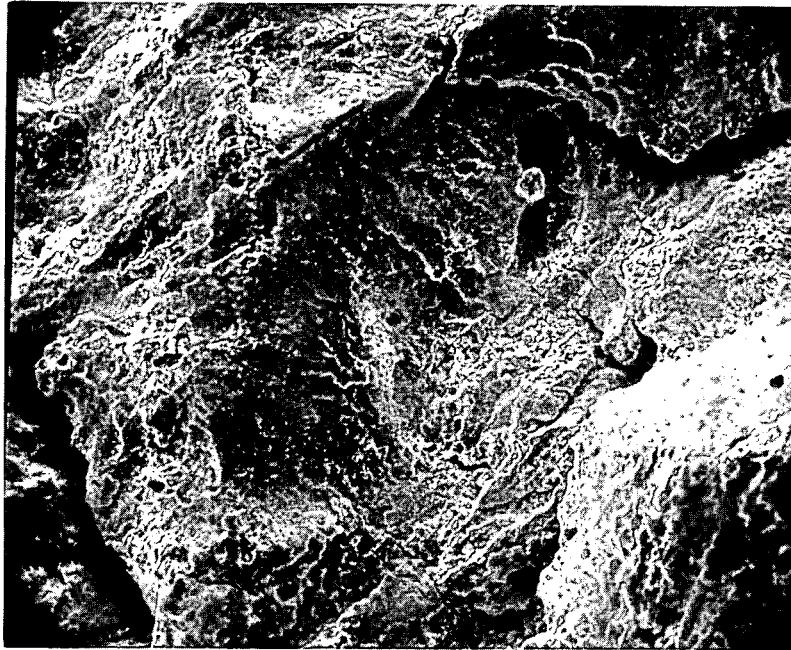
SEM of primary fracture surface after some ultrasonic cleaning. Note the secondary cracks.
